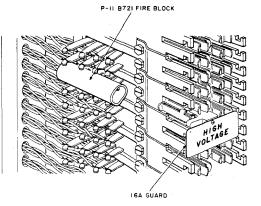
Protecting B-Type Frames and 444-Type Jacks
